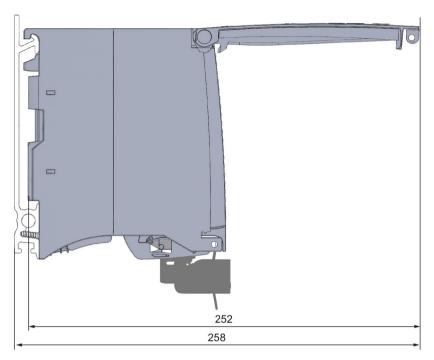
Dimension drawing of CPU 1511C-1 PN – side view with front panel open
